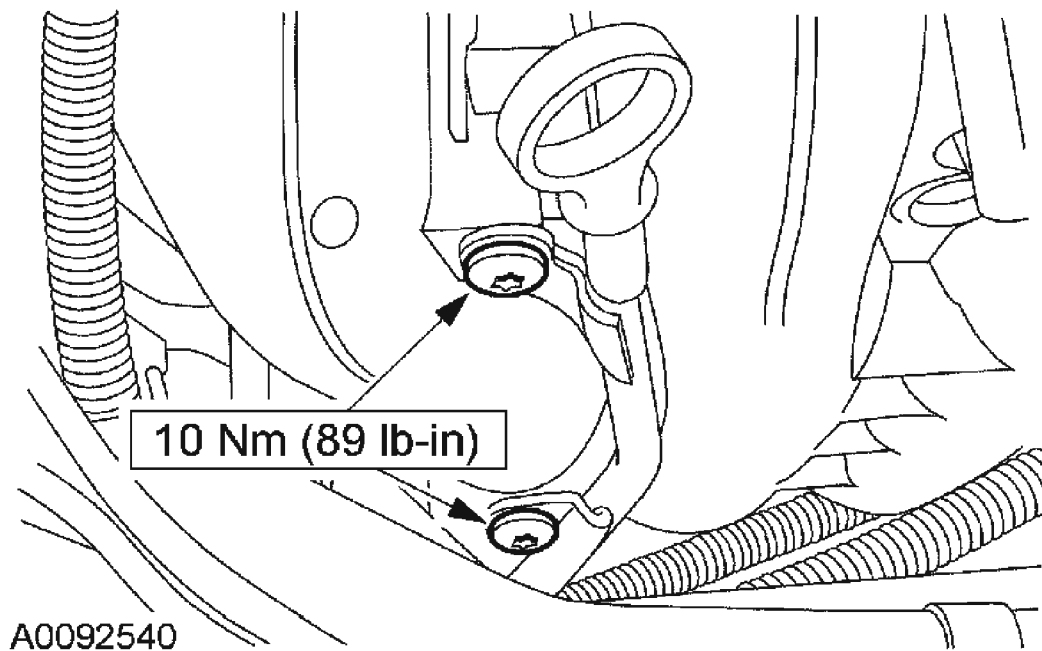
Installing Oil Level Indicator Tube Assembly Bolts
